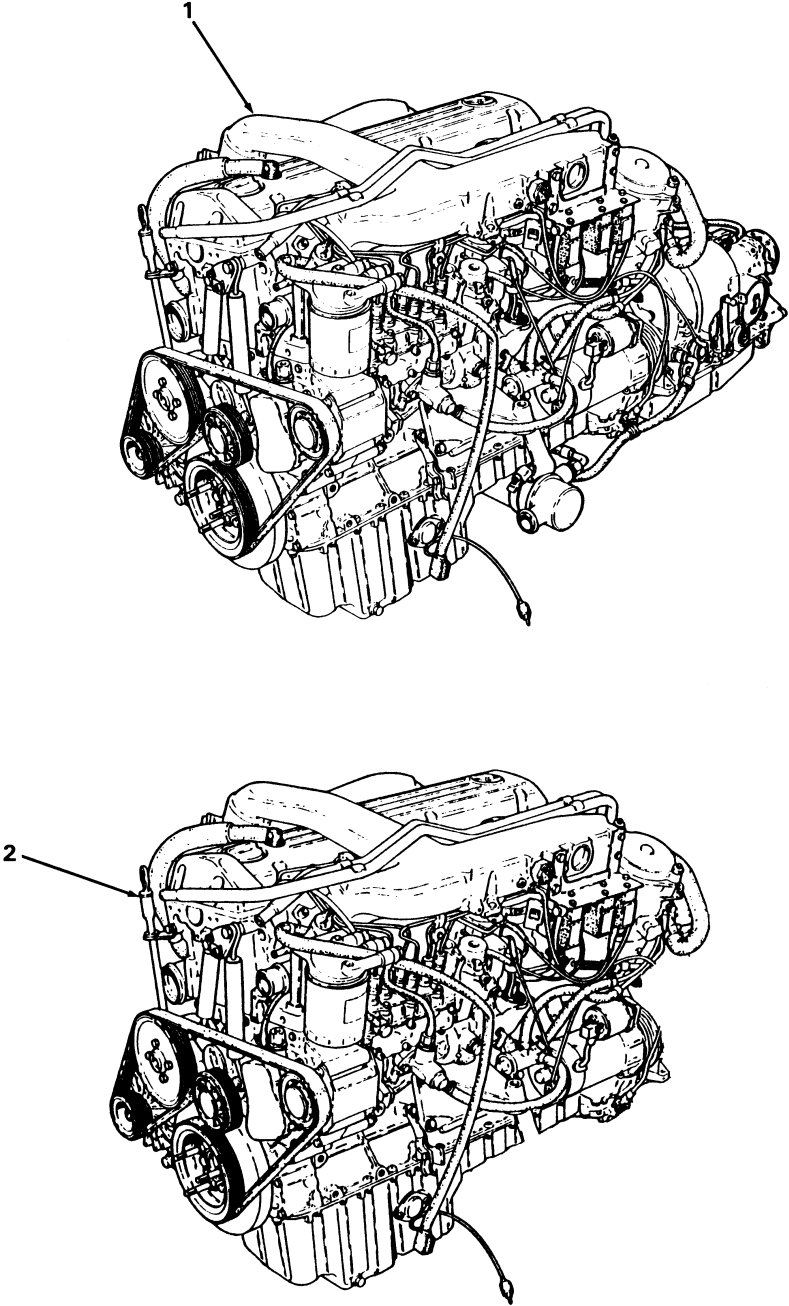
POWERPACK AND ENGINE ASSEMBLY.
